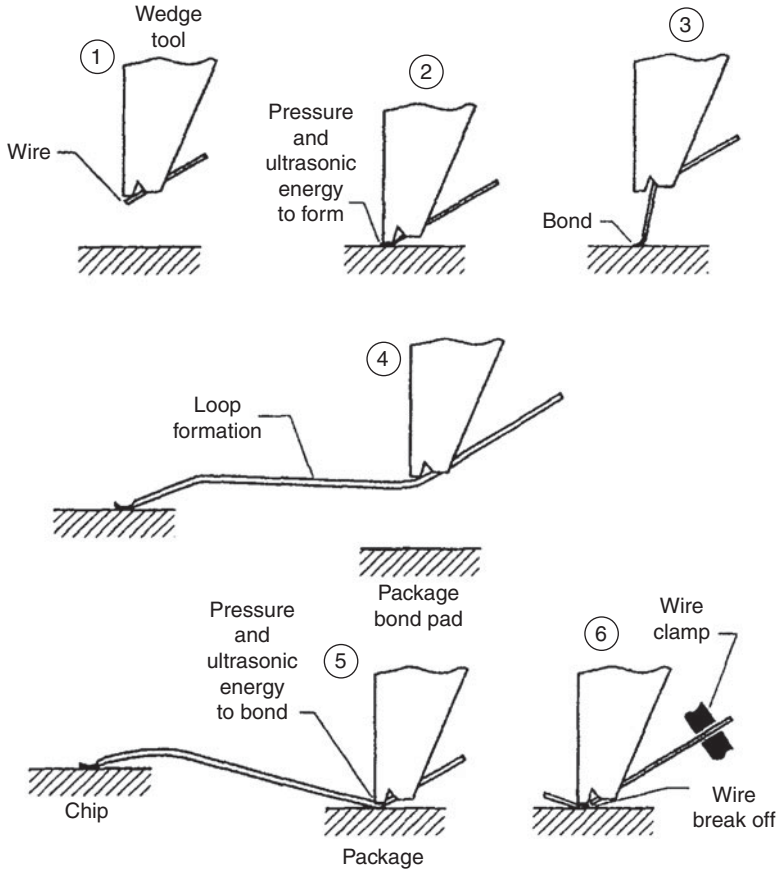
Simplified procedure for making an ultrasonic-wire bond between a chip-bond pad and the package with a typical wedge-type tool. (1) Wire is located between the bonding surface of the tool and the bond. When used on a manual bonding machine, the tool is lowered to its first search position (75 to 125 m above the bonding surface). This height is chosen by the operator. Autobonders eliminate the search position entirely. (2) The tool is lowered and presses the wire against the bonding surface with a predetermined force. Ultrasonic energy is applied for a preset time to make the first bond. (3) The tool is raised while the wire is paid out from the spool of wire (not shown). (4) The work holder moves the second bonding site under the tool (if an autobonder, usually the transducer and tool moves), the loop is formed and the tool is lowered to its second search position (similar to steps described in 1). (5) The tool is lowered to the bonding pad, and the second bond is made, as in 2. (6) After the second bond has been made, a wire clamp (behind the tool) closes and pulls back on the wire to break it at the heel of the bond. The tool is then raised, and the end of the wire is fed out underneath the tool until the end is located somewhat beyond the front of the tool (the tail length), as shown in 1. The bonder is then ready to repeat the cycle. Updated and redrawn from Ref. [1-2].
